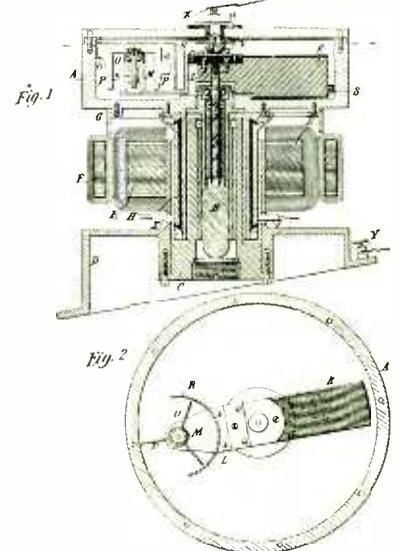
Electrical Oscillator, Illustrated in Fig. 15, Showing Details of Motor and Break Mechanism.
